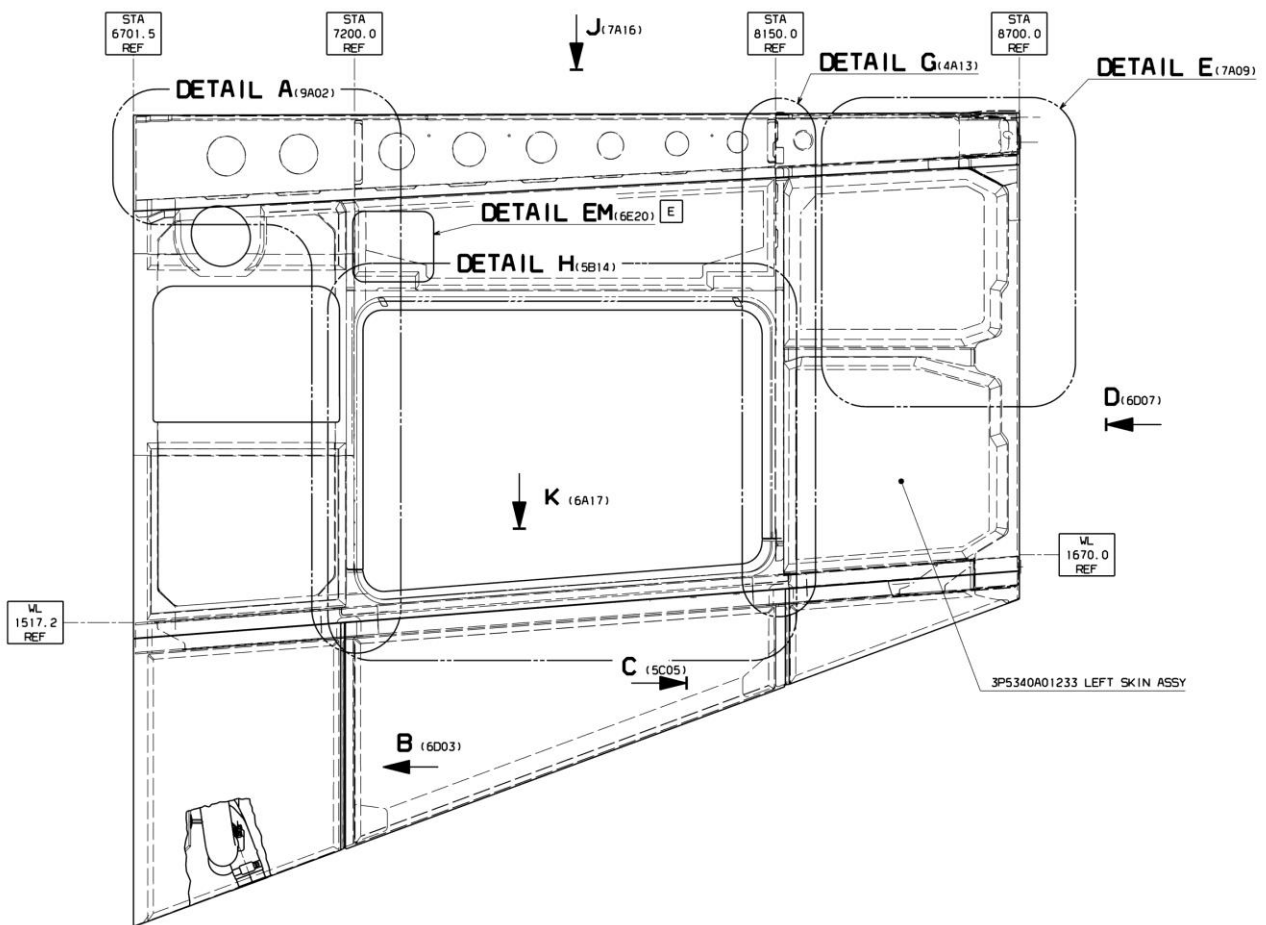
Baggage door locking installation – Detailed view and rivet list for Figure 1 thru Figure 2
